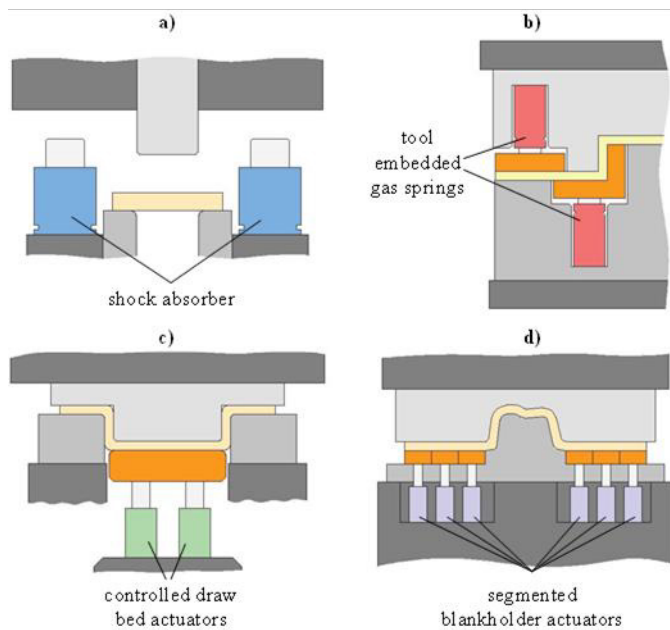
Examples of auxiliary systems: a) hydraulic shock absorber for blanking; b) tool embedded gas springs; c) controlled draw bed for deep drawing; d) segmented blankholder.
